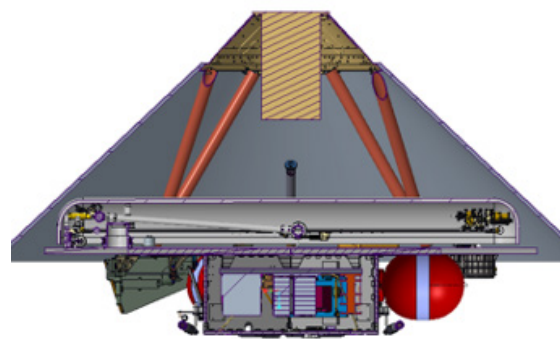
Cutaway side-view of aeroshell with lander with the drill and bio-barrier showing clearance.
